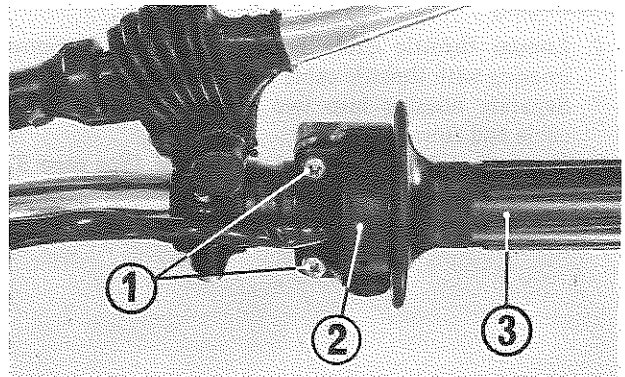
(1) Headlight switch housing screws (2) Headlight switch housing (3) Left grip rubber
